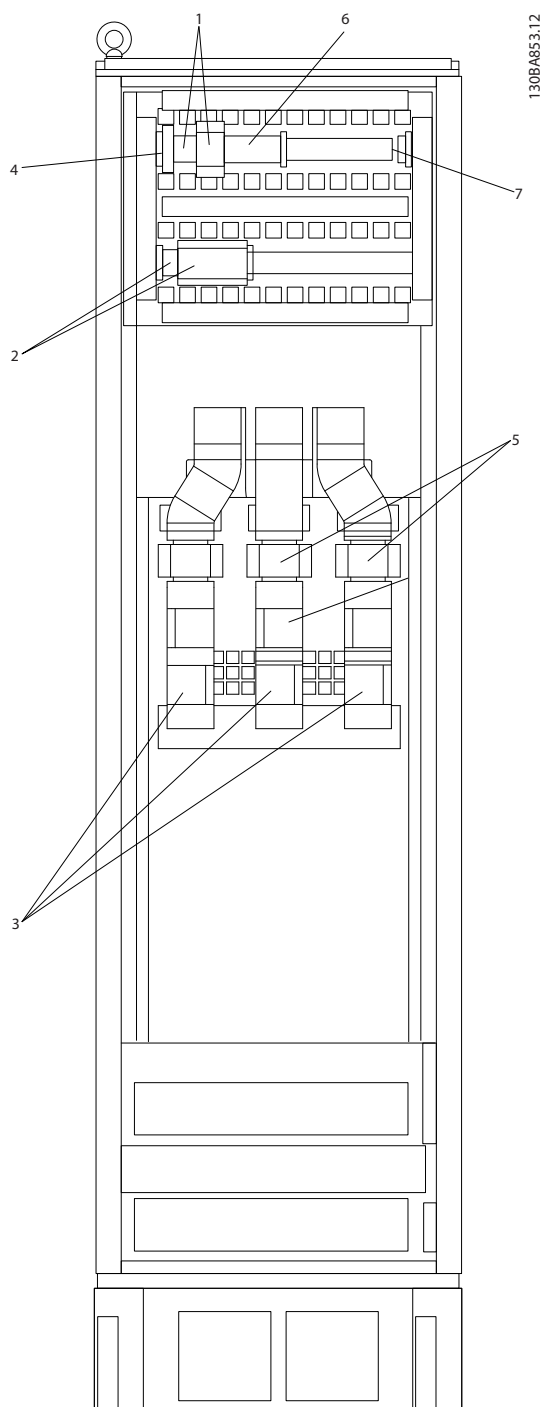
Inverter Cabinet, Enclosure Types F1 and F3
